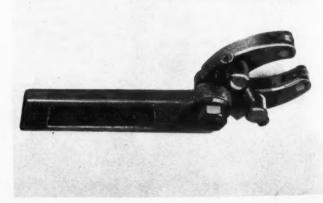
Knurling Tool Brought out by the Becker Tool Co.
